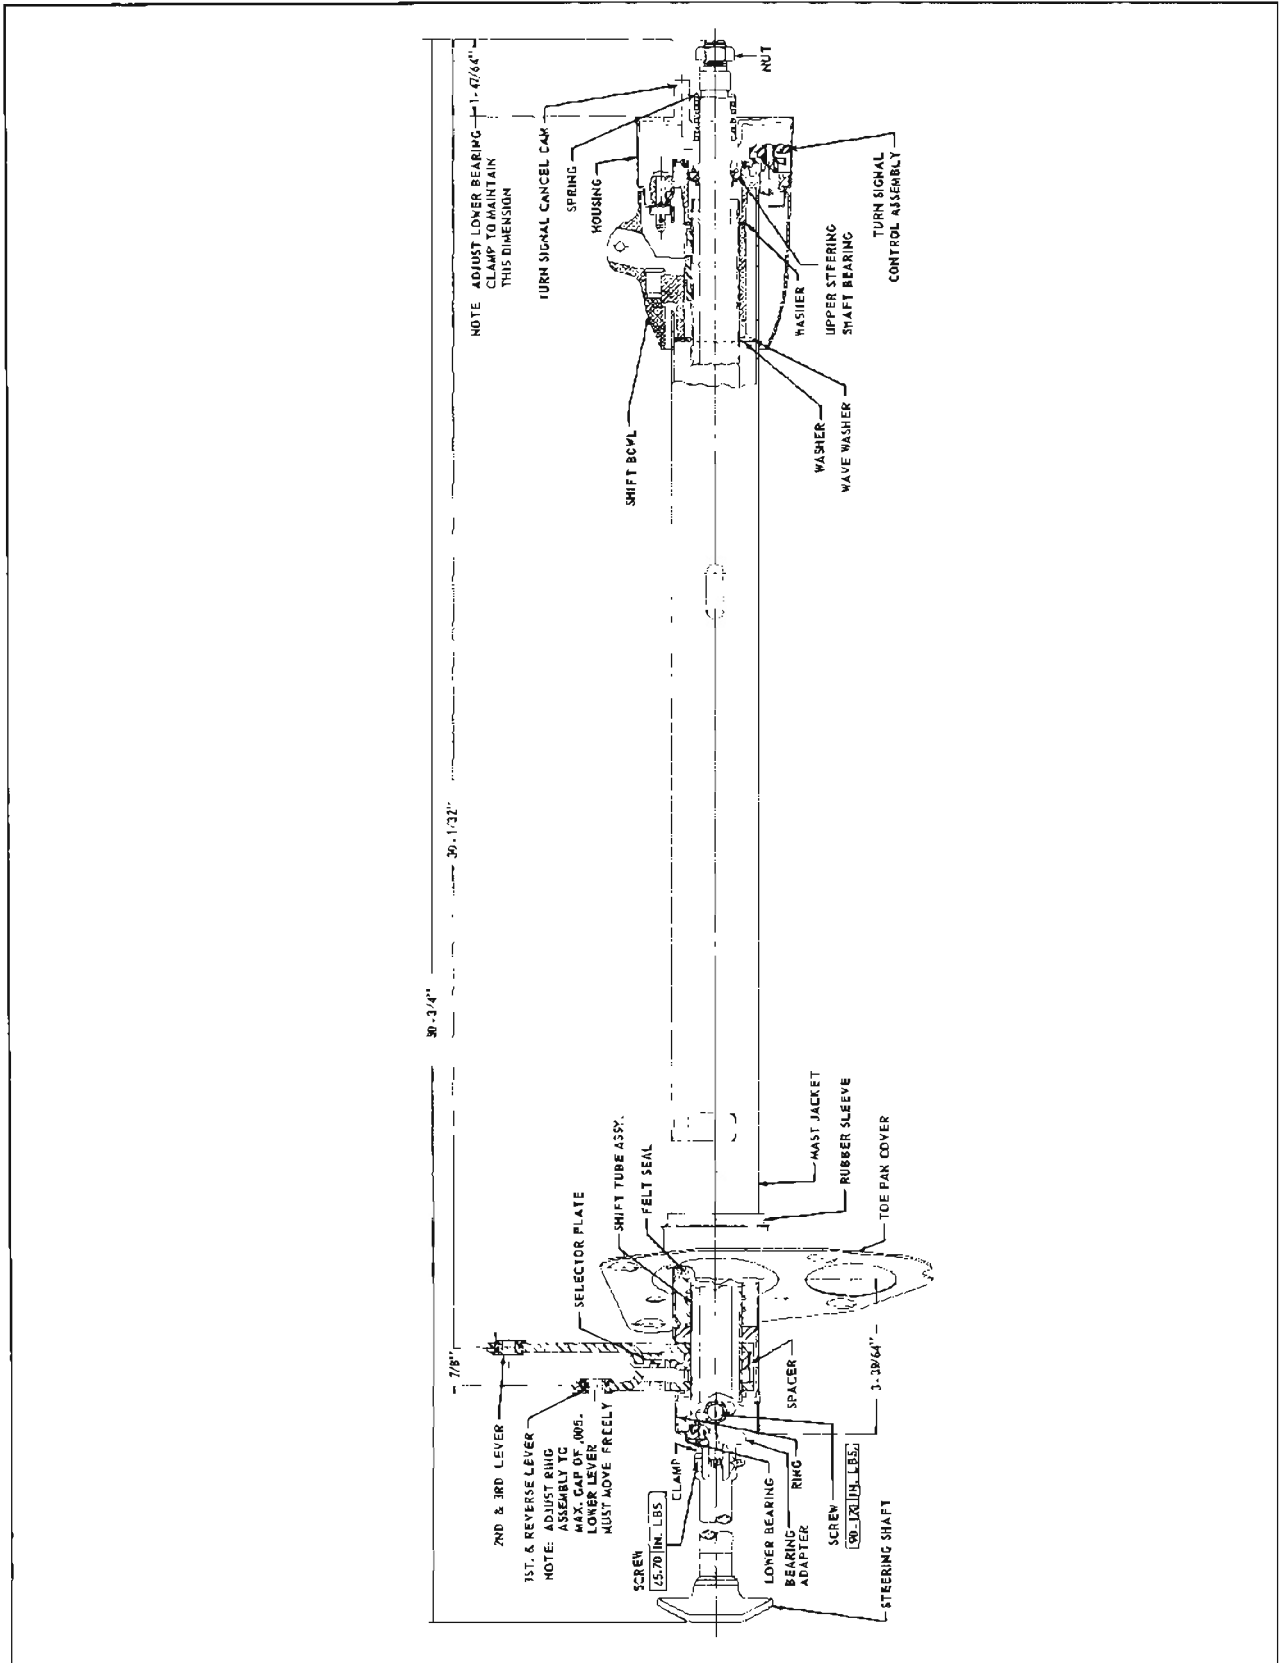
Mast Jacket and Transmission Control Shaft Assembly - Three Speed Synchromesh Transmission
